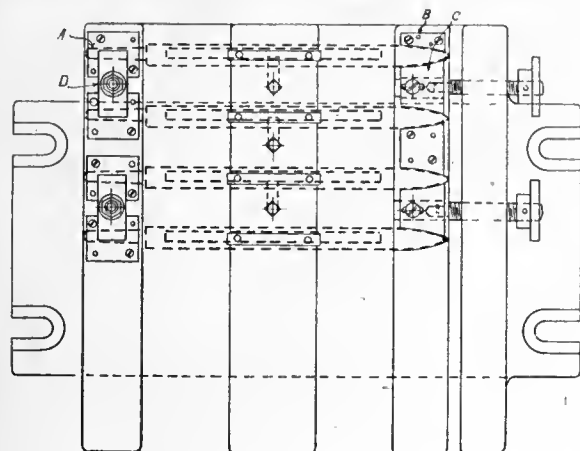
MILLING GROOVES ON SIDES OF BLADE.
